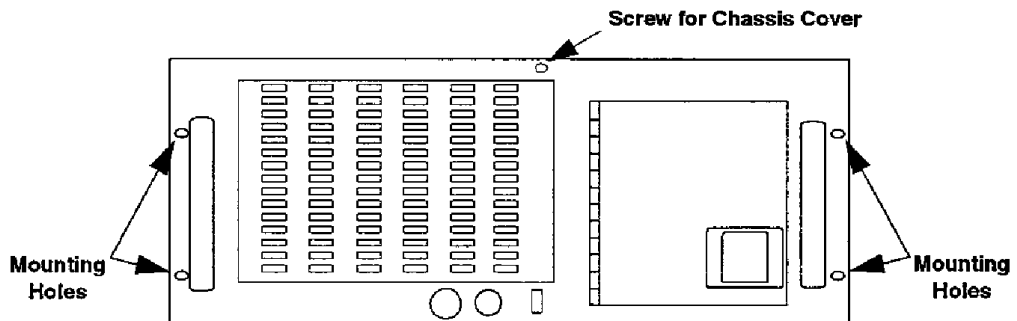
CH-EXP12: Front-Panel Mounting Holes
